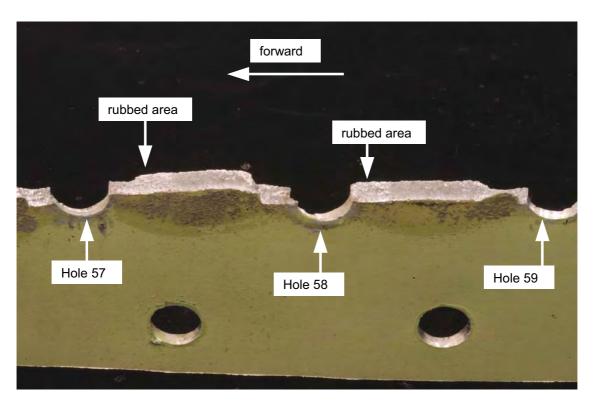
, Photograph of the fracture surface at Holes 57, 58, and 59. The shiny areas are indicative of rubbing with the mating fracture surface and appeared consistently forward of this area, but were not present aftward beyond Hole 62.
